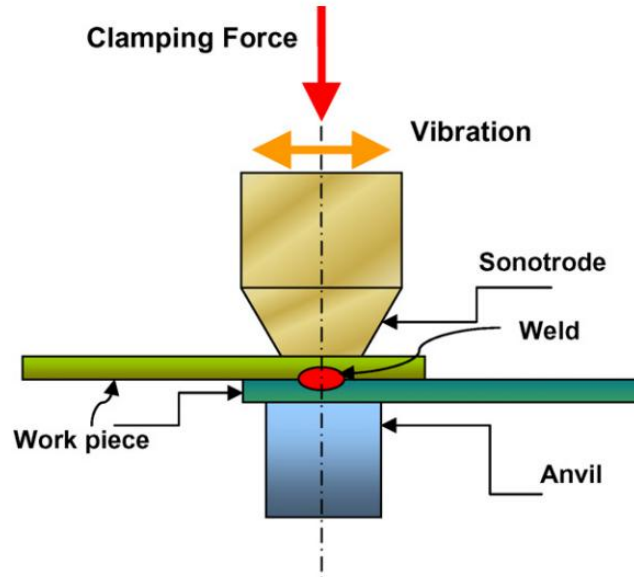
Schematic of ultrasonic welding process.
